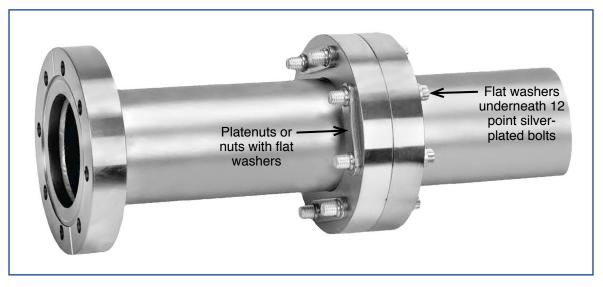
Fasten CF flanges with silver-plated, 12 point bolts, washers, and nuts
